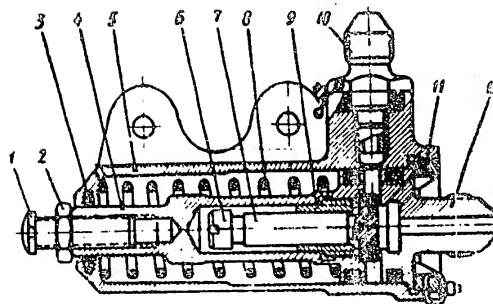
L.G. Main Struts Emergency Extension Cylinder
